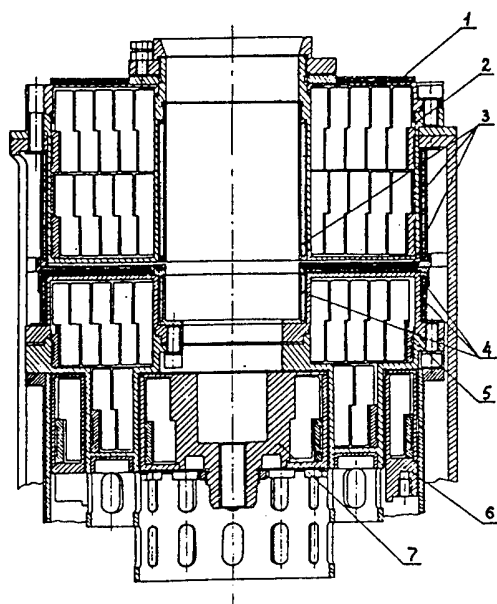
Core axis section. 1, 3, 4 - boron screens; 2 - stable upper unit; 5 - movable low unit; 6 - controlling unit; 7 - pulse unit.
